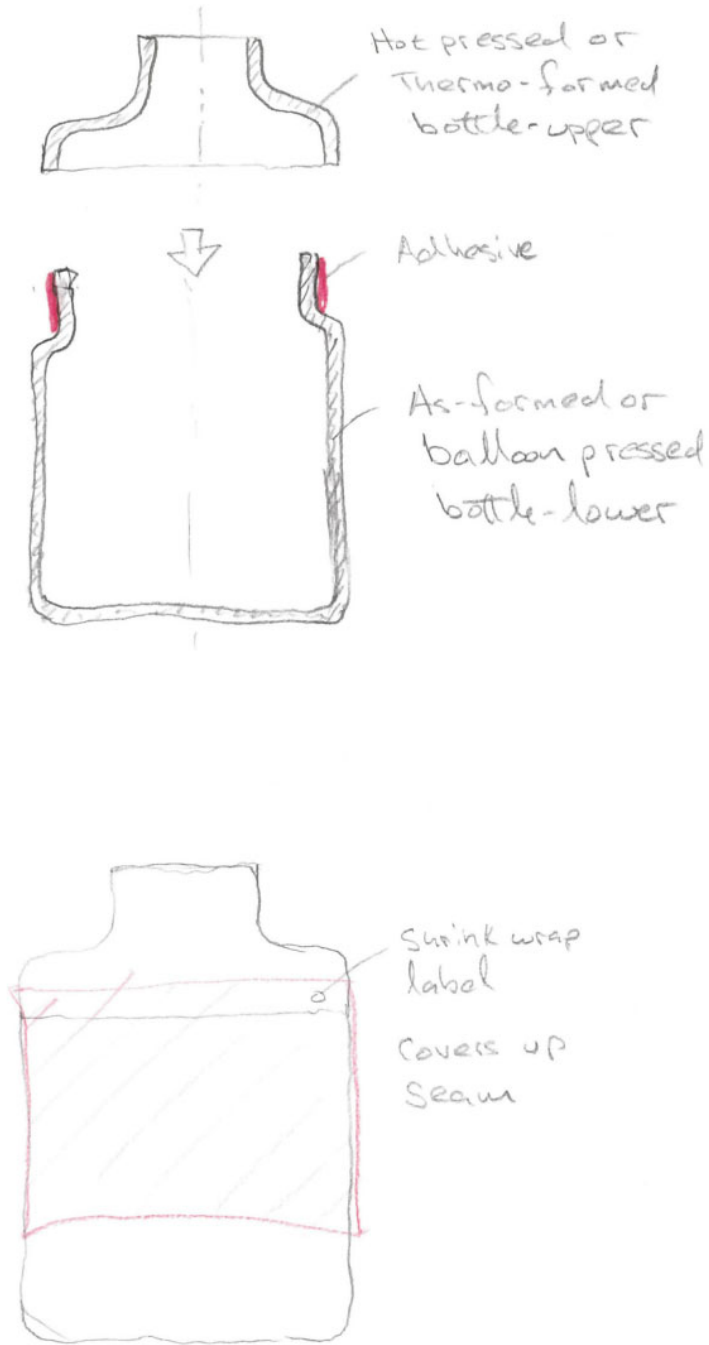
Hand drawn image of a hypothetical multi-part bottle (two parts for this example)
